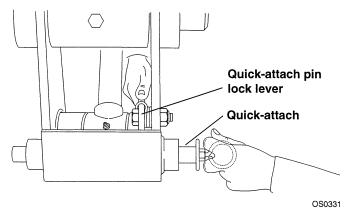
Raise the quick-attach pin lock lever and pull out the lock pin at the bottom of the quick-attach.
